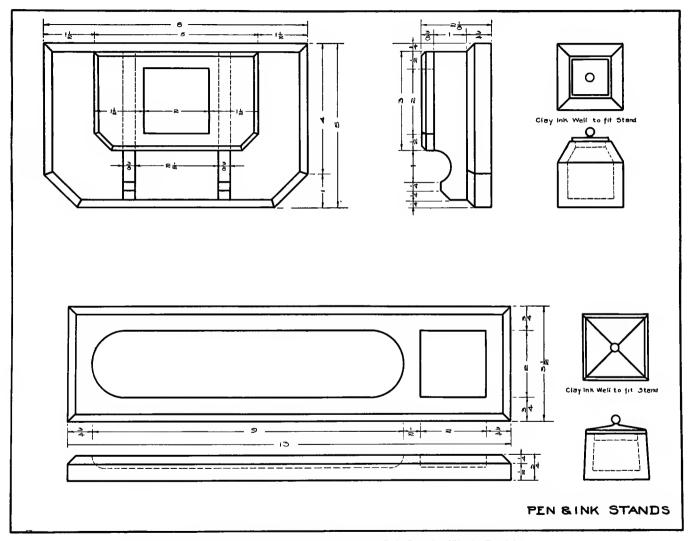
Working Drawing for Pen and Ink Stands (Sixth Grade)
